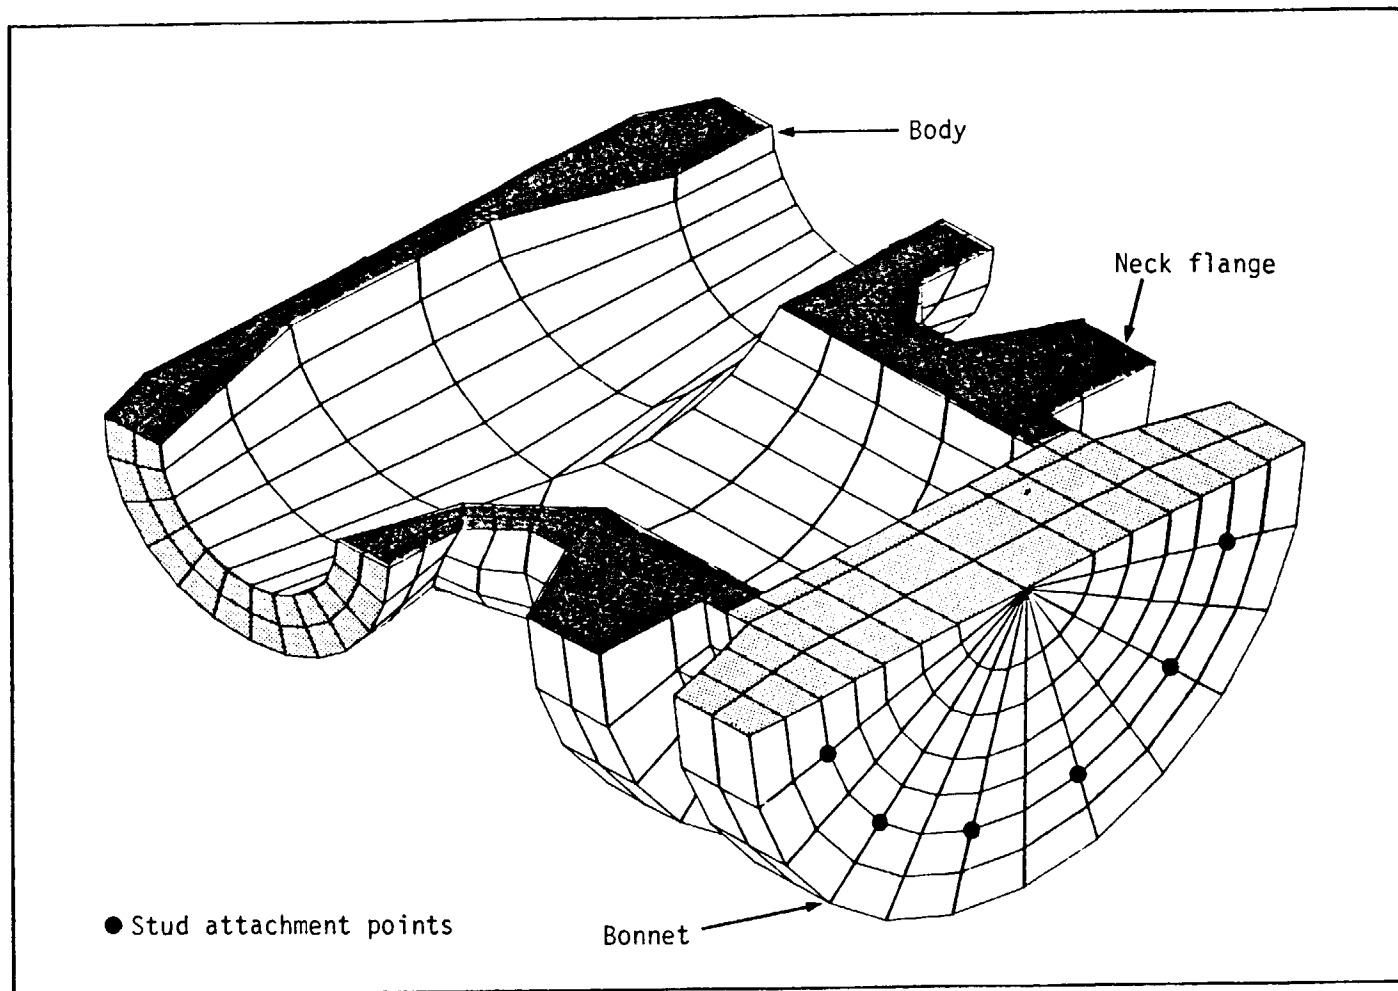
Six-Inch (15 cm) Check Valve Model
